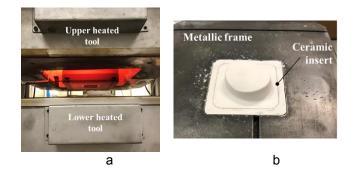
(a) SPF press machine: details of the ceramic insert and (b) the heated tools.
